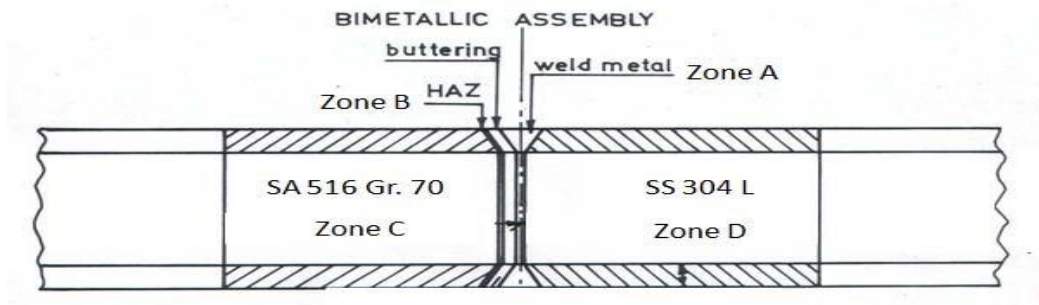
Schematic of weld sample showing different zones
